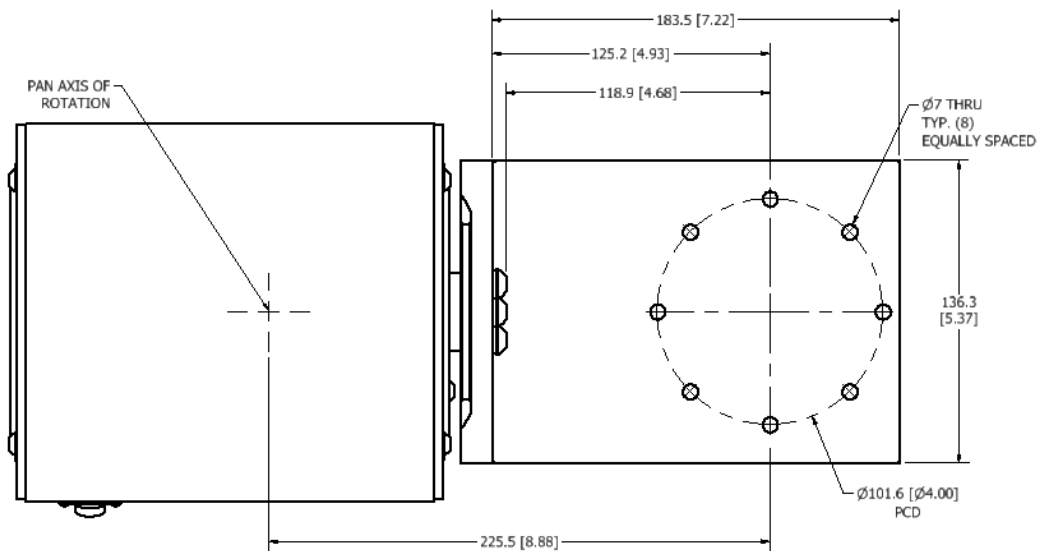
AP-50 Side Mount - Payload Mounting Pattern
